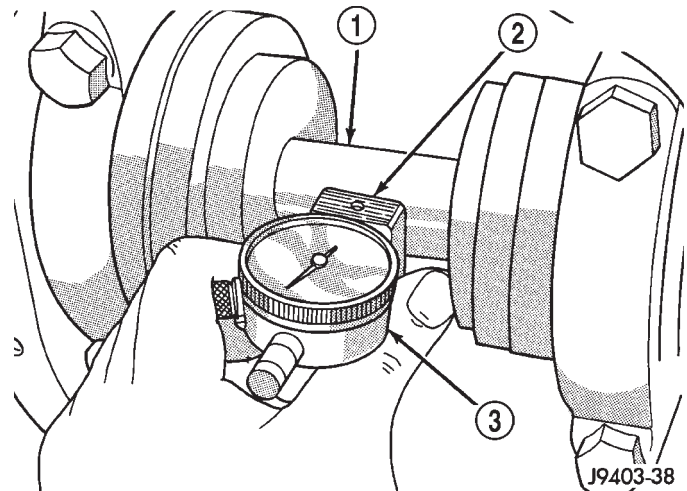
PINION GEAR DEPTH MEASUREMENT
